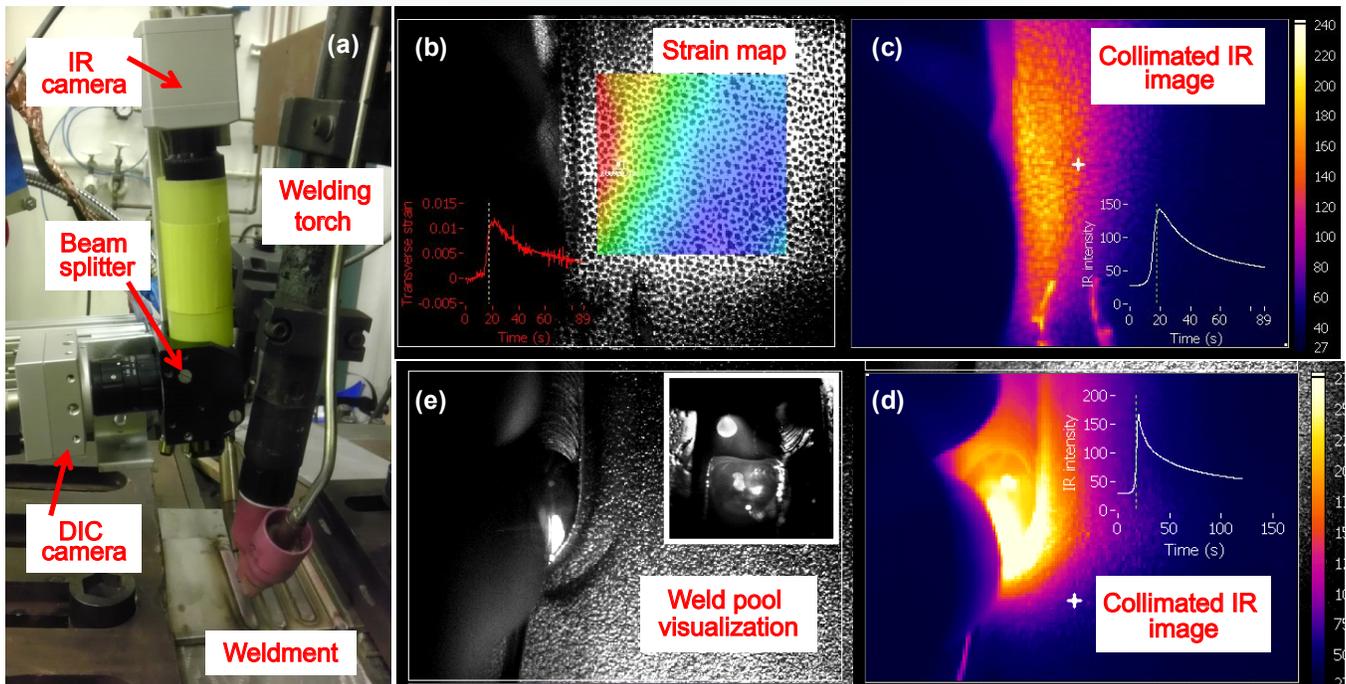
Integrated optical sensing technology for welding in-situ monitoring.
